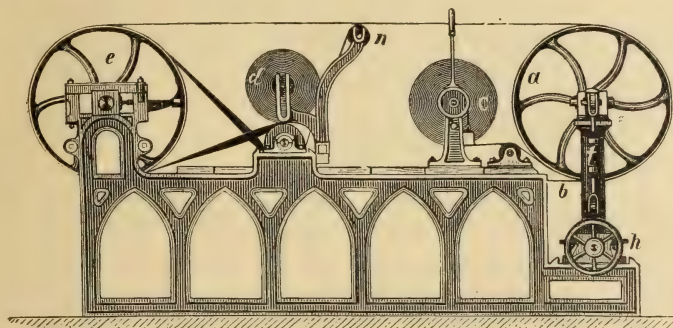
Poole's stretching machine, side view, made by Jackson & Brother, Bolton.
